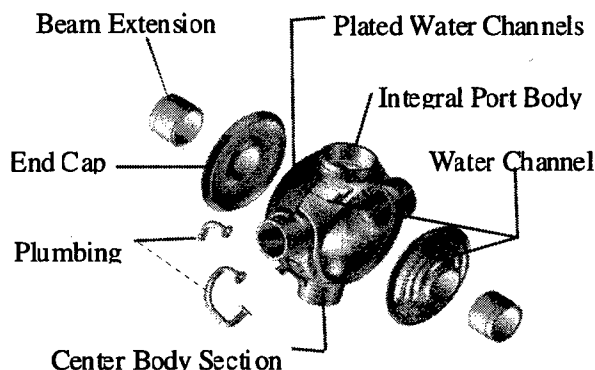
An exploded view (flanges omitted) of the ALS third-harmonic cavity showing integral equatorial port bodies, end caps, beam tube extensions, and plumbing.
